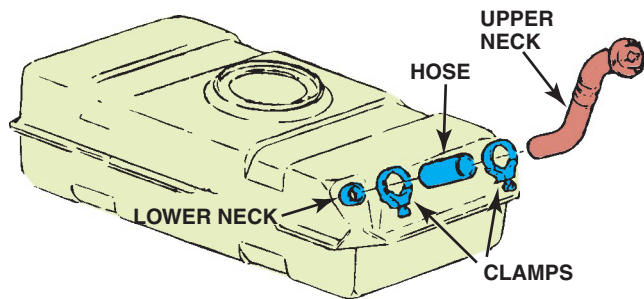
A three-piece filler tube assembly. The main three parts include the upper neck, hose and lower neck.
